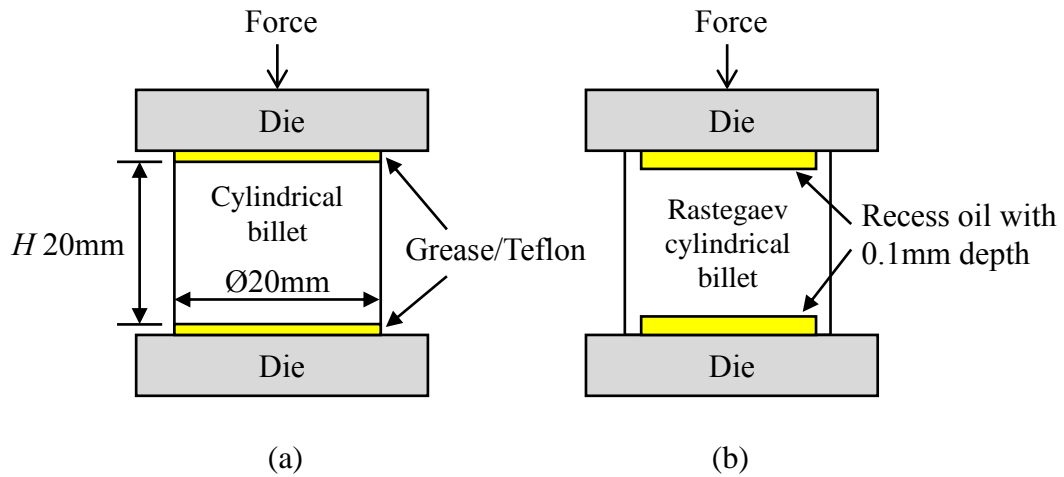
Upsetting tests with a) cylindrical specimen and b) Rastegaev specimen having an oil recess of 0.1 mm (figure not drawn to scale).
